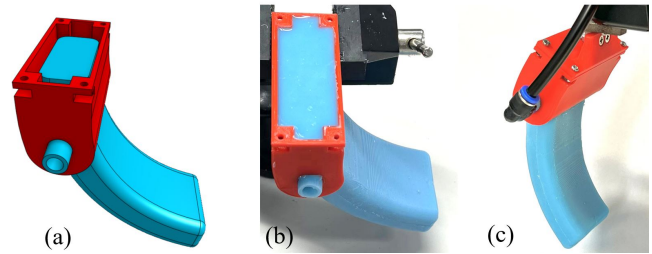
(a) Pouring silicone to fix the finger chamber with the shell of finger base. (b) The Finger base after curing. (c) A complete prototype.
